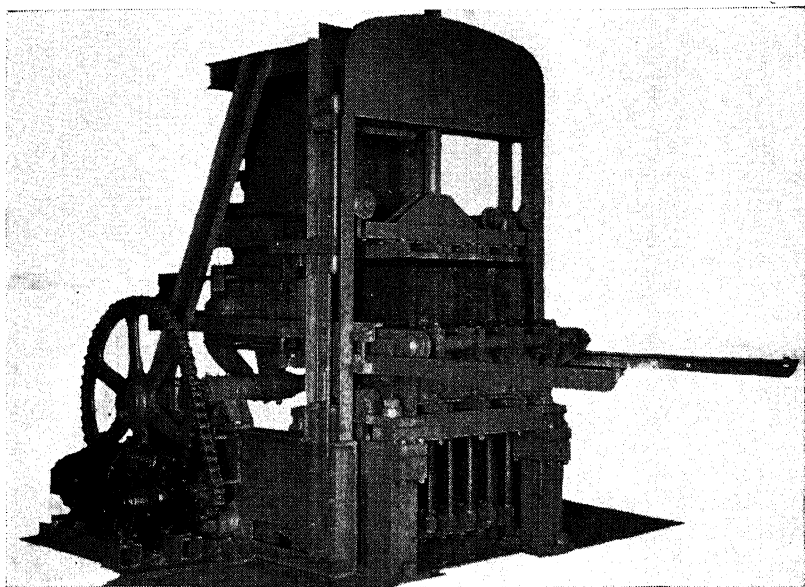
"Joltcrete," a machine used for forming concrete blocks. It operates on a principle of vibration rather than the conventional method of dumping, employing 7200 picking blows per minute for improved mixing and stronger concrete blocks. Arc welded steel construction is used to fullest extent possible to provide maximum strength, rigidity and economy.
